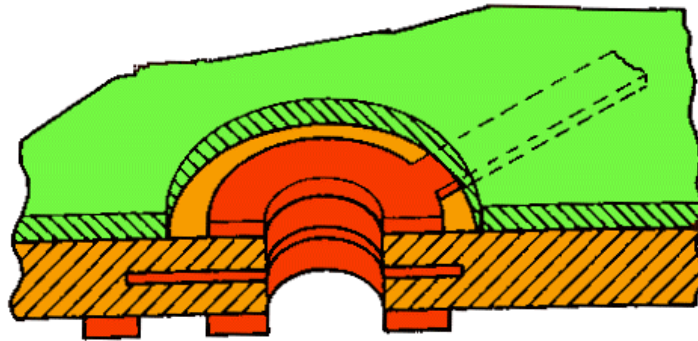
Schematic of PCB structure; solder resist shown in green (Reference 1)
